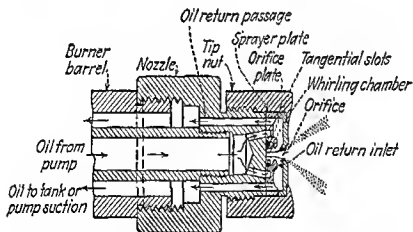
Return-flow atomizer, pressure type—Todd Combustion Equipment.
